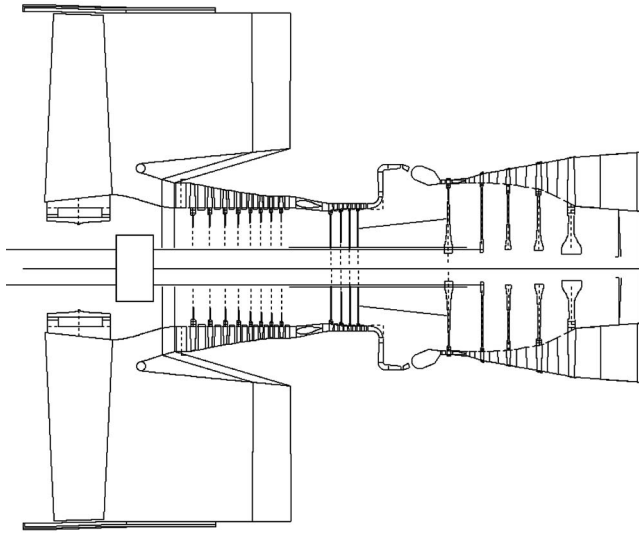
Design C: Geared turbofan for the Silent Aircraft modified for lower noise
